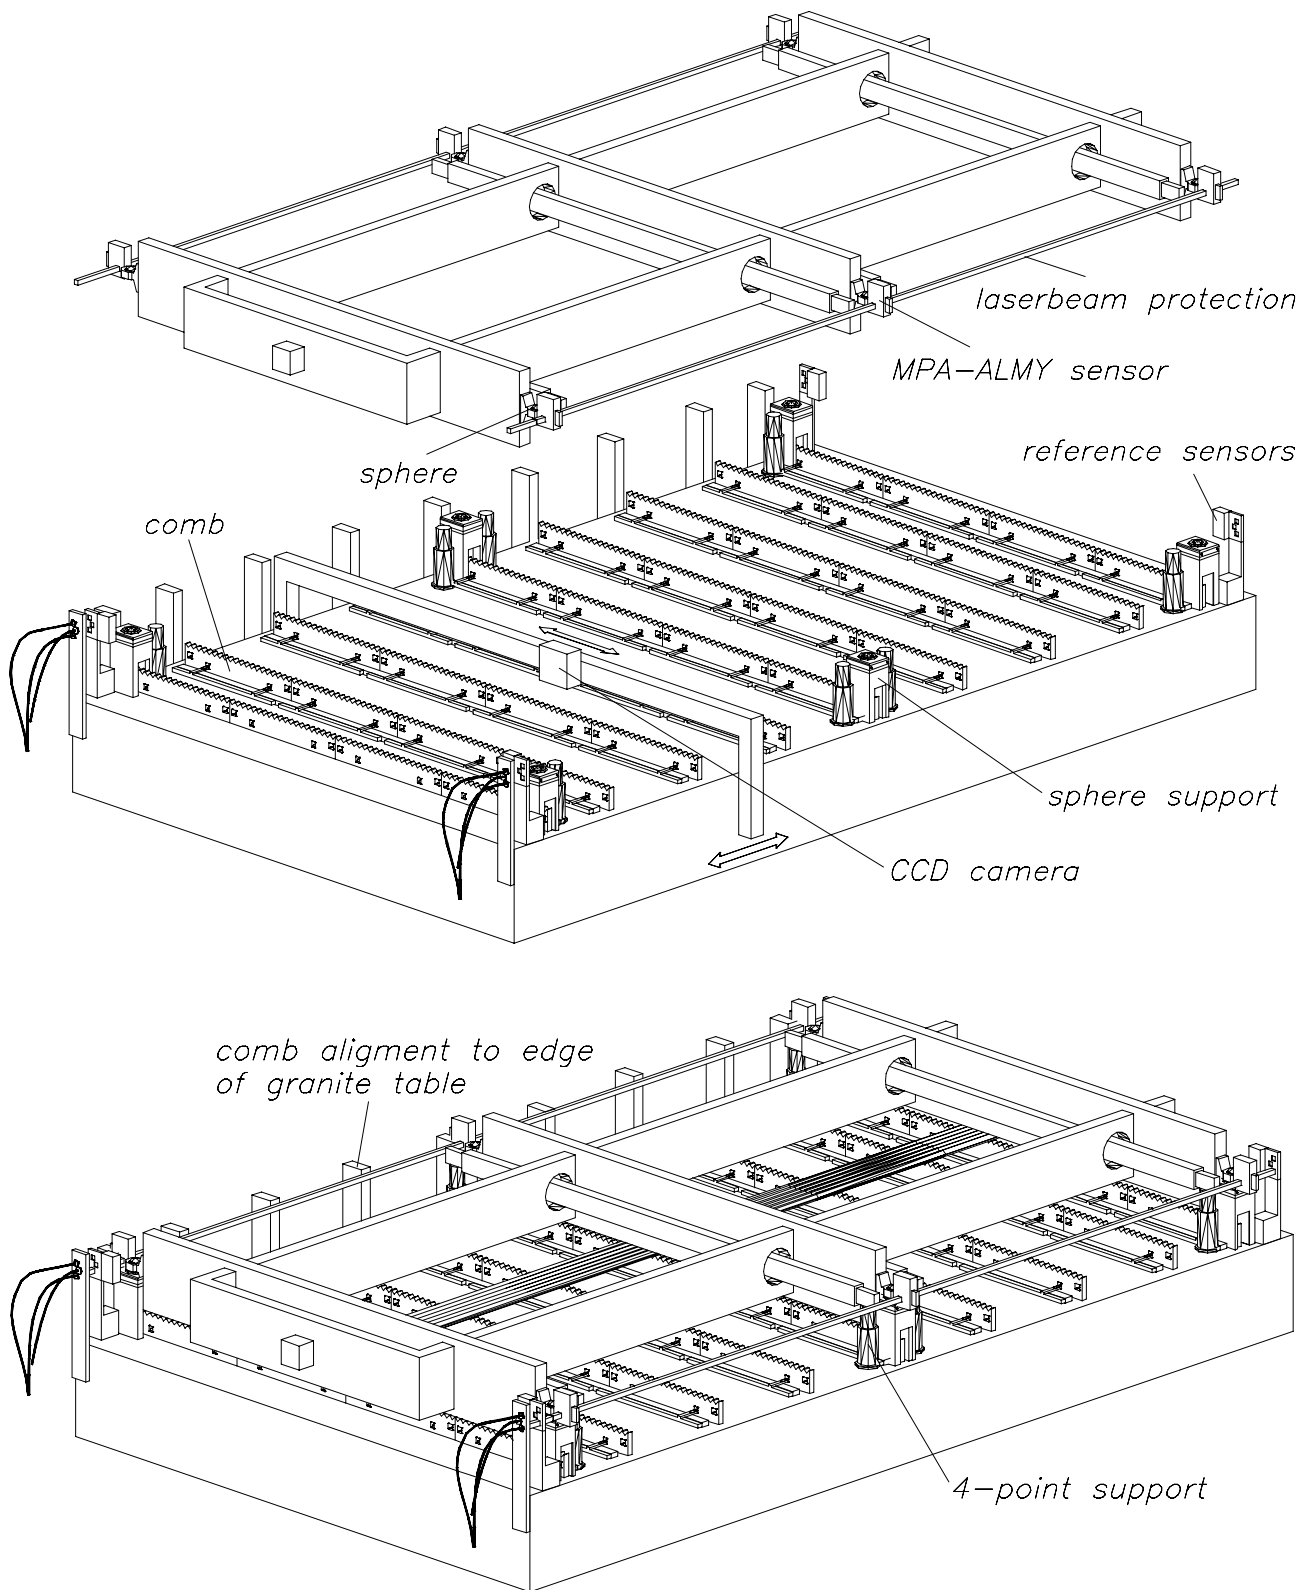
Assembly jig setup with monitoring devices for the BOS chamber construction.
